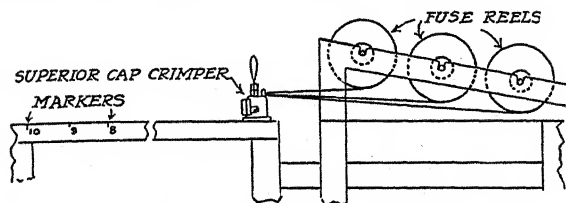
Fuse cutting arrangement utilizing Du Pont Superior Crimper
